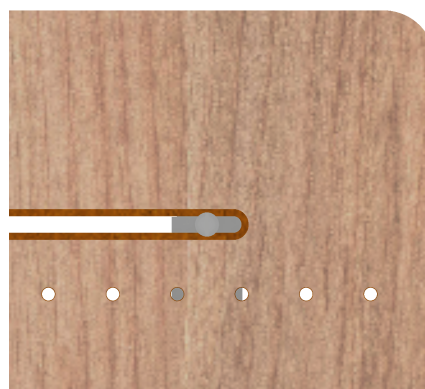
Bottom view of the mounting plate that shows how the head of the bolts for the transmitarray can slide freely.
